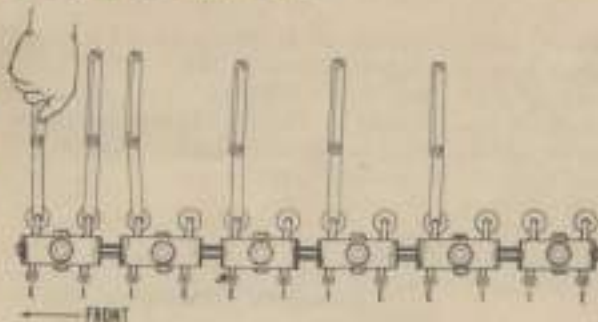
D-17 diesel. With number 1 piston at TDC on compression stroke, valve clearances (trapper gap) can be set on the six valves indicated. Clearance for inlet valves (I) should be 0.010 inch hot; 0.019 inch hot for exhaust valves (E). Refer to Fig. 34A and adjust remainder of valves.
